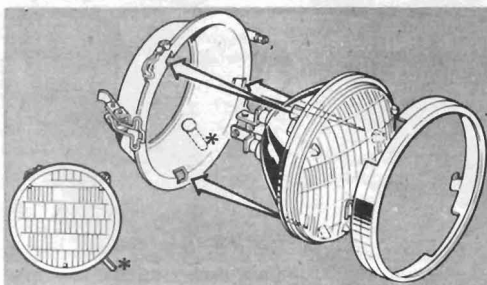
Components of a sealed beam unit (Sec 15)
